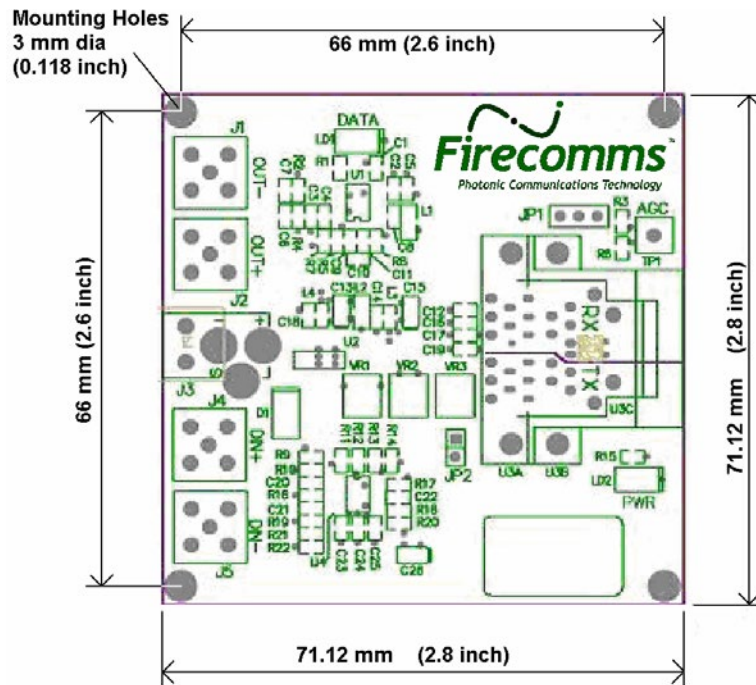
A Mechanical Drawing of the PCB for the F01178 Evaluation board.
